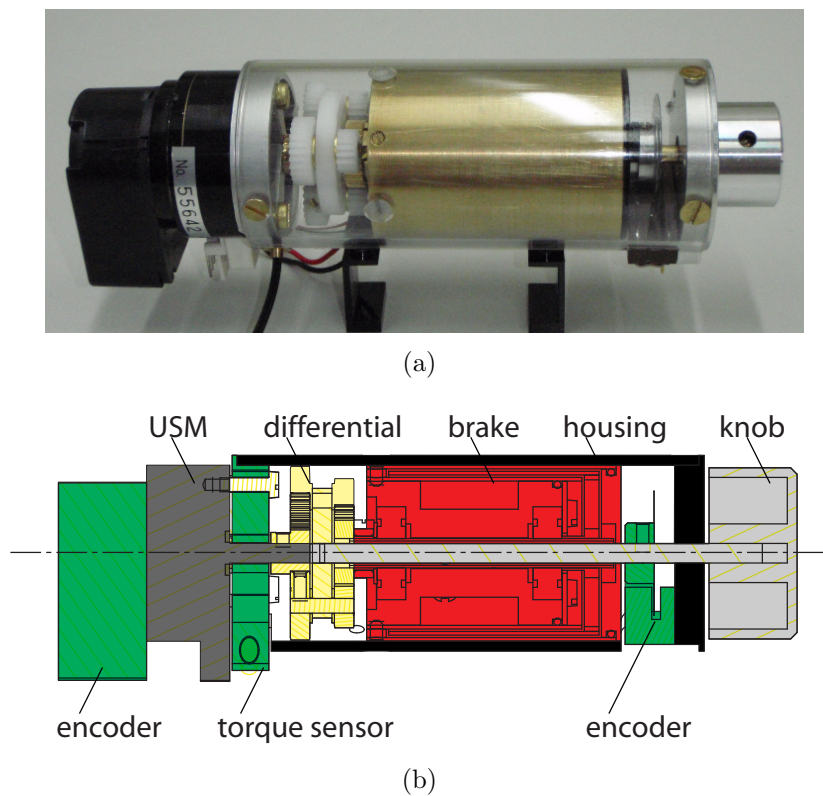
fMRI compatible hybrid actuator for interaction with the fingers. Actuator diameter: 40 mm, length: 132 mm without the knob. (a) Picture, (b) cross-section view with the placement of the different components. The output shaft of the HUCA passes through the brake.
